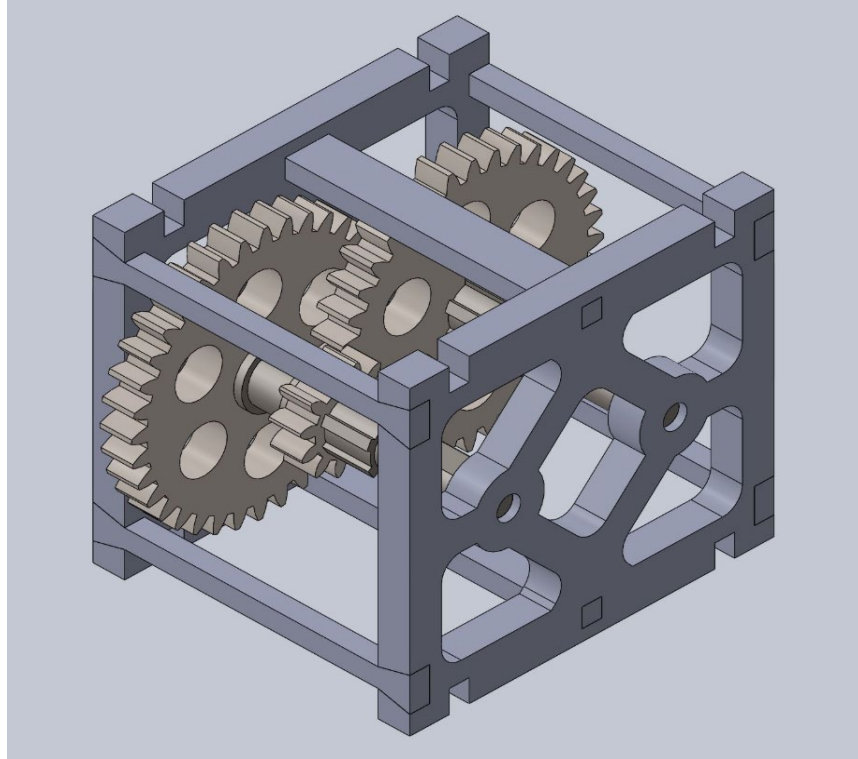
Rendered CAD model of the entire gearbox assembly. Enclosure shown in grey, and gears/shafts shown in brown.
